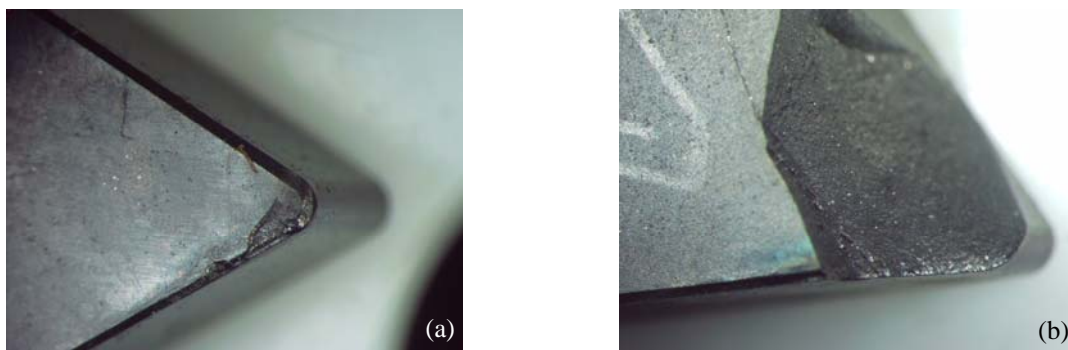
Chipping and breakage of CBN cutting tool during high speed turning of grey cast iron (a – chipping, b – breakage).
